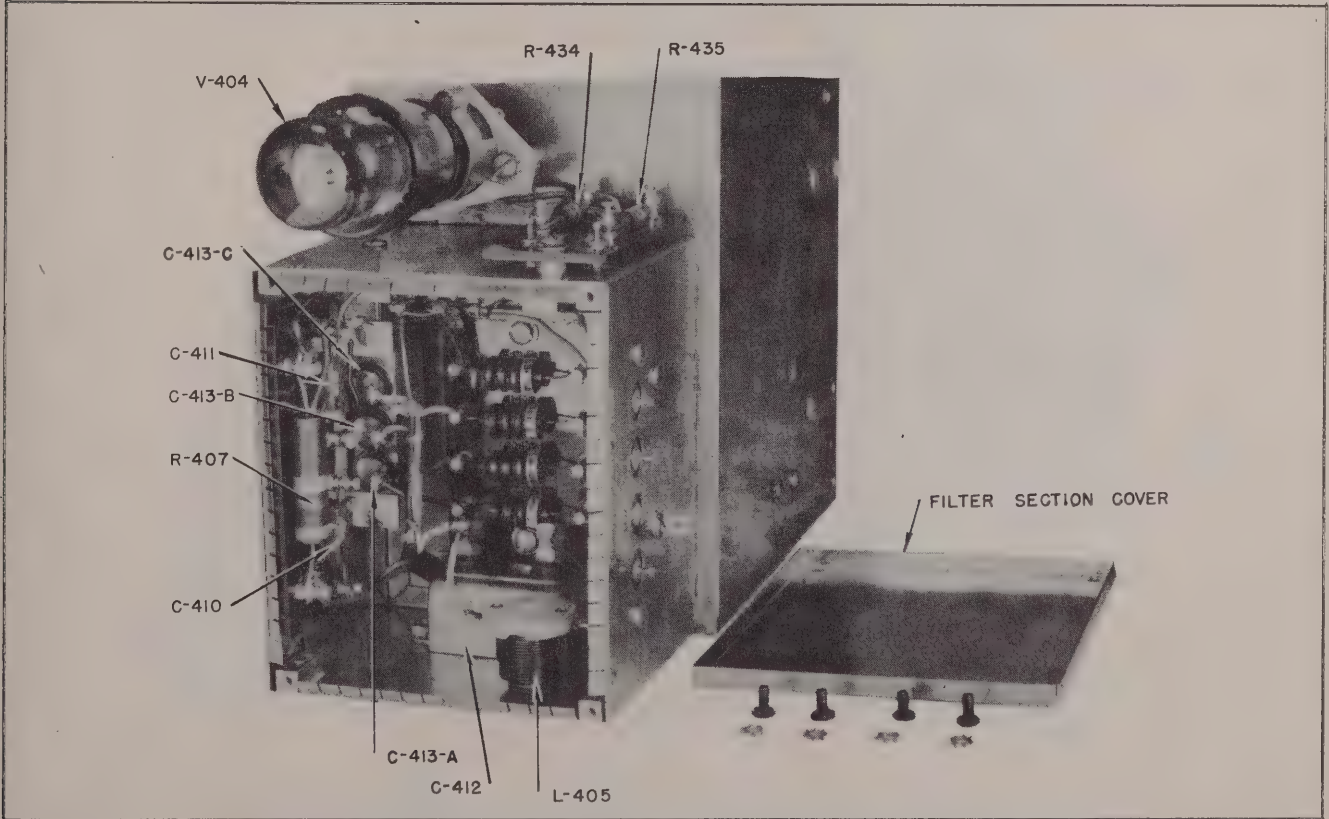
Signal Generator Unit, Top View, Filter Cover Removed
